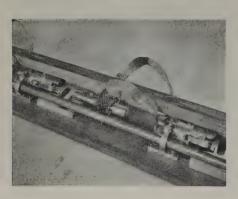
One contact assembly, showing tulip-type finger contacts and slotted oil ports
